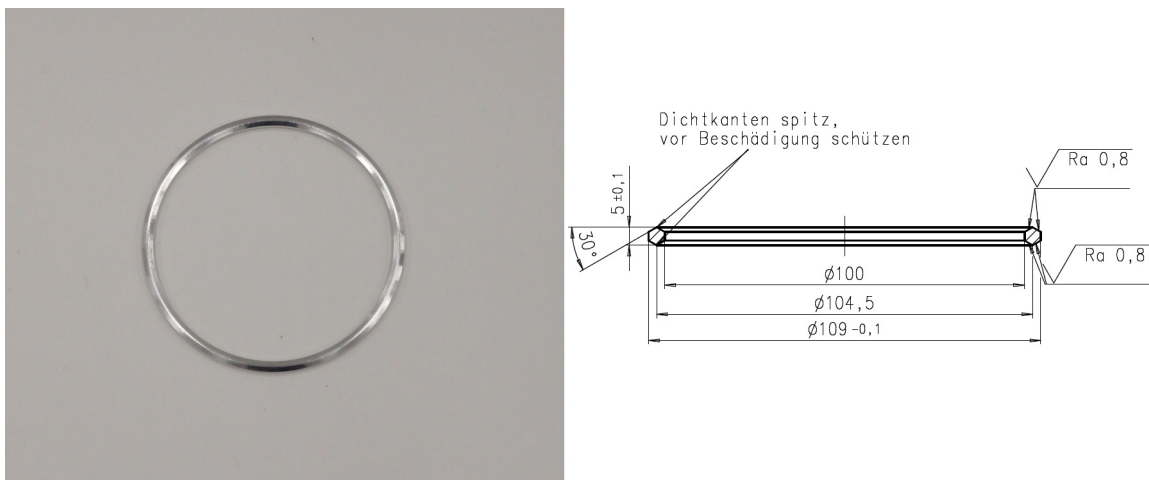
Left: Photo of the Al gasket. Right: Schematic drawing of the Al gasket, with dimensions in millimetres.
